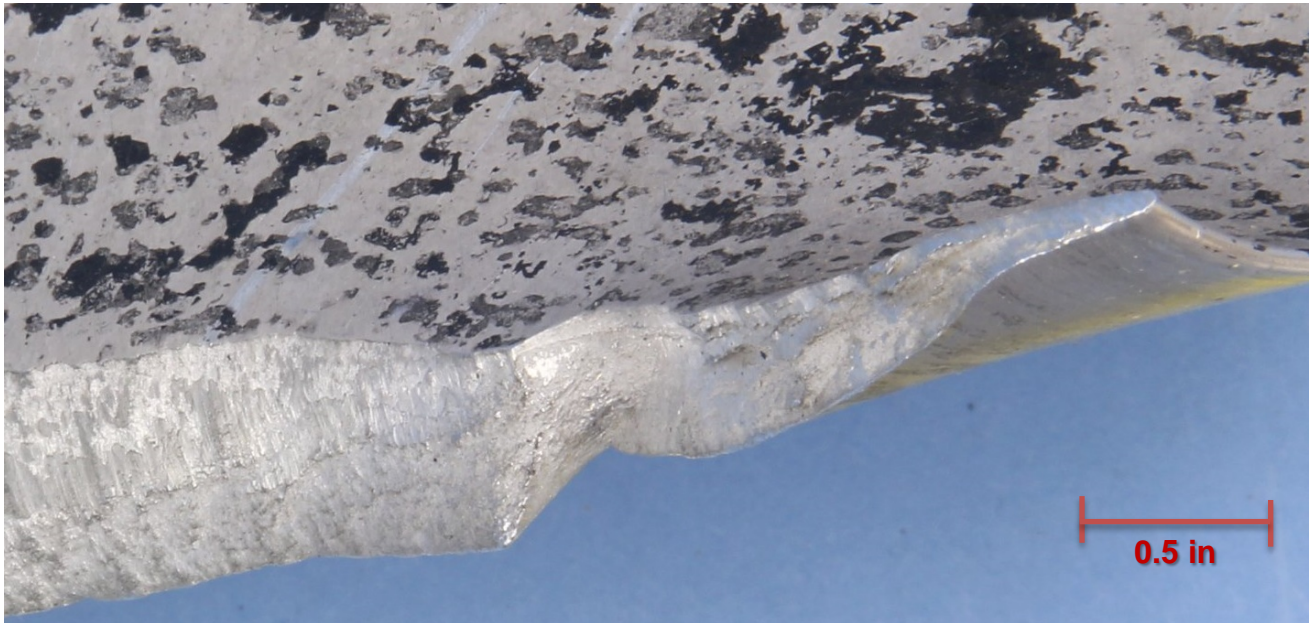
Closer view of the trailing edge of the fracture surface of the propeller remnant.
